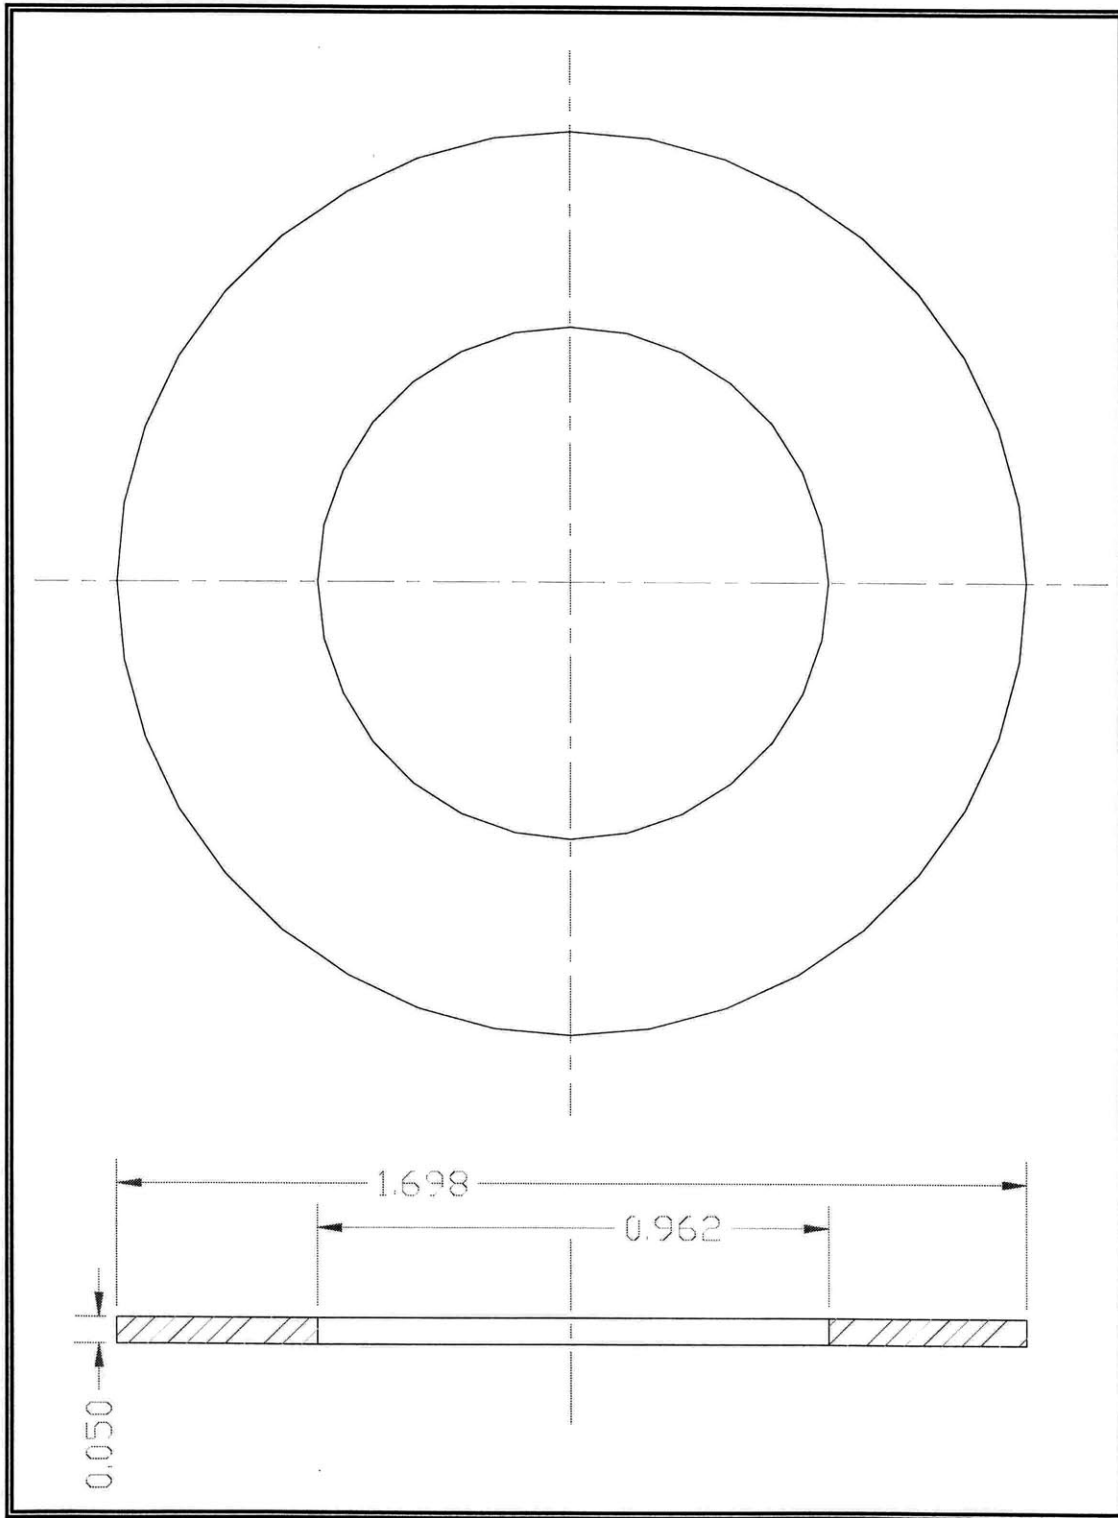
The inner diameter of the outlet valve disk is slightly larger than 0.96 inches, assuring the expander piston does not strike it when passing through
